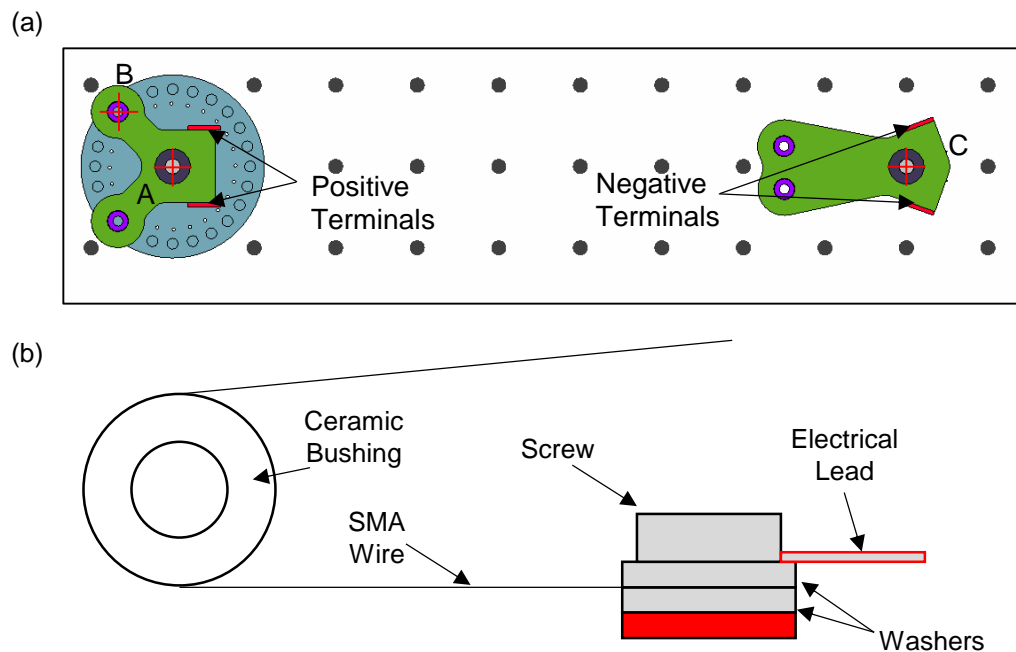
(a) Model of antagonistic shape memory alloy actuated mechanism. (b) Illustration of wire clamping mechanism.
